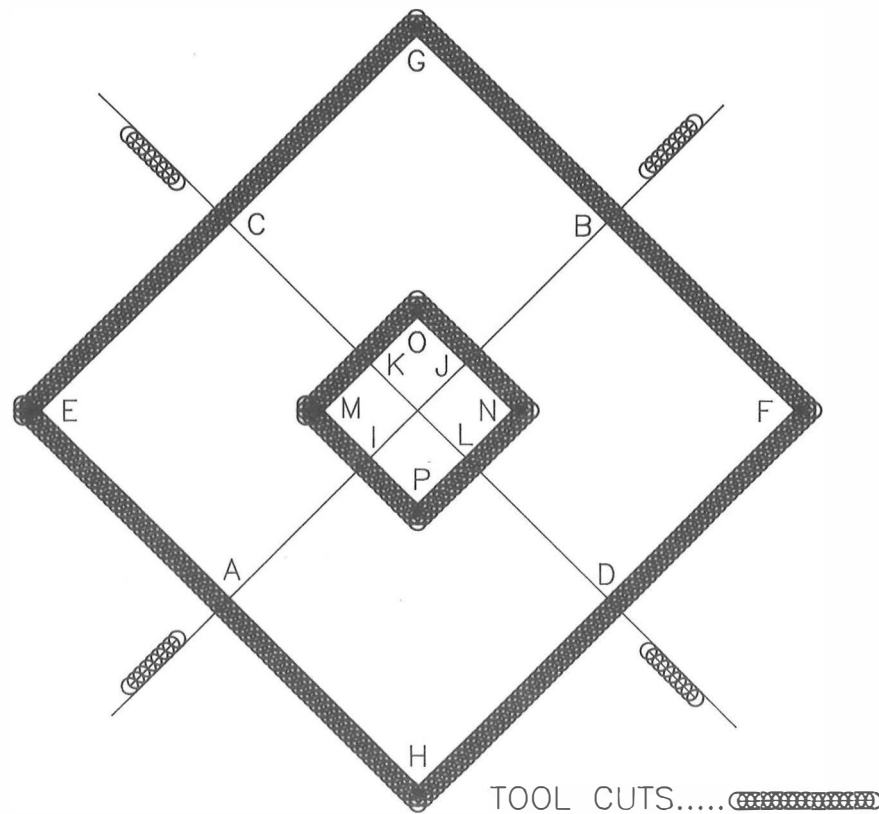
Drawing showing accuracy cuts in acrylic sheet and measurement points for both the 2-inch and 8-inch diamonds.
